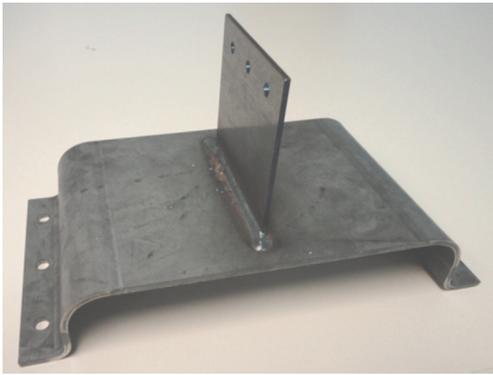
Welded Specimen “Mini-Structure 4 (MS4)”
